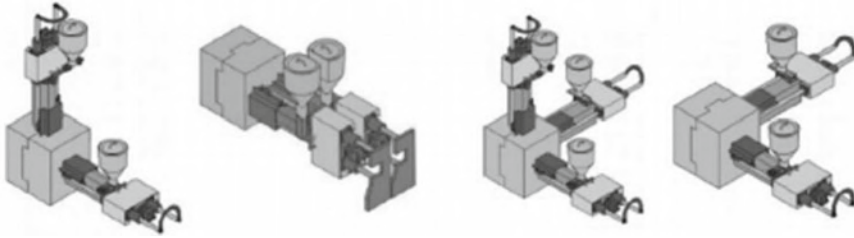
Different arrangement of injection unit in multi-component injection molding machine
